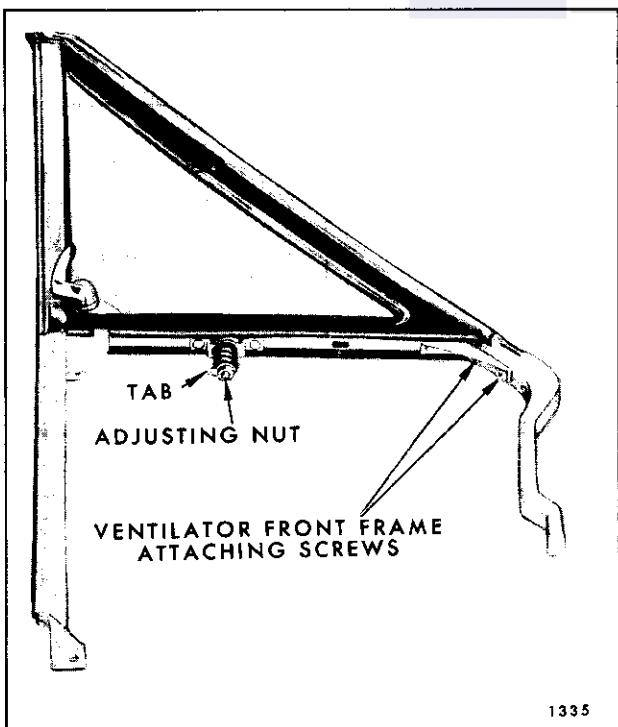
Front Door Ventilator Assembly — "X & Z" Styles
